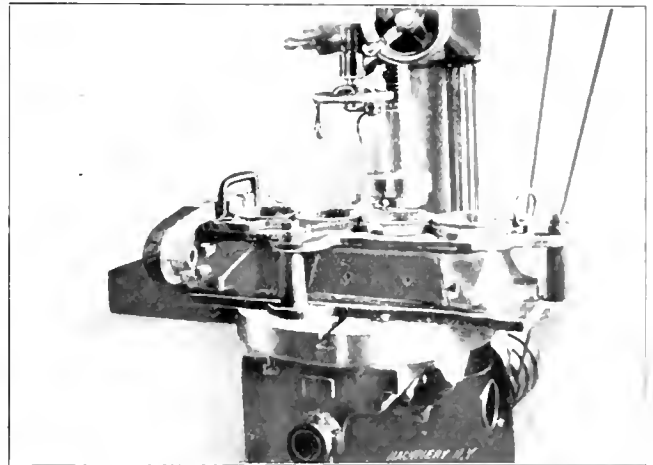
Jig and Boring Tool for Boring out Cylinder Holes in Crank Case.
